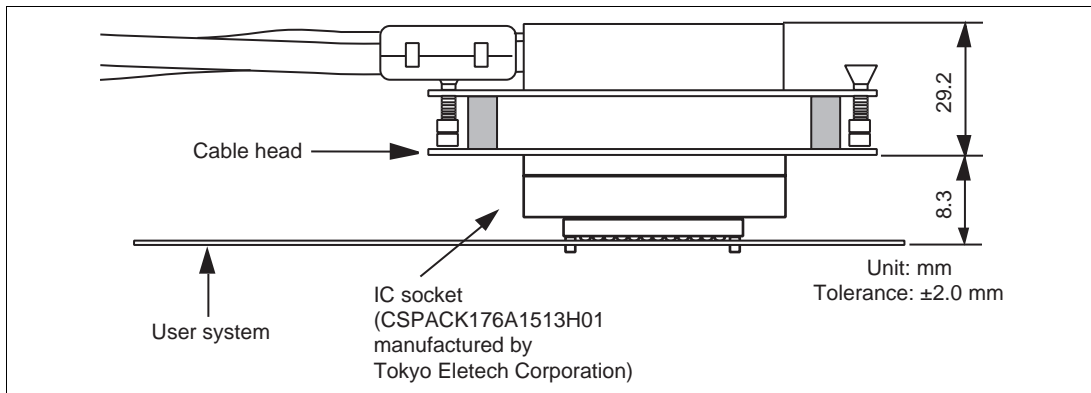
Resulting Dimensions after Connecting User System Interface Cable
